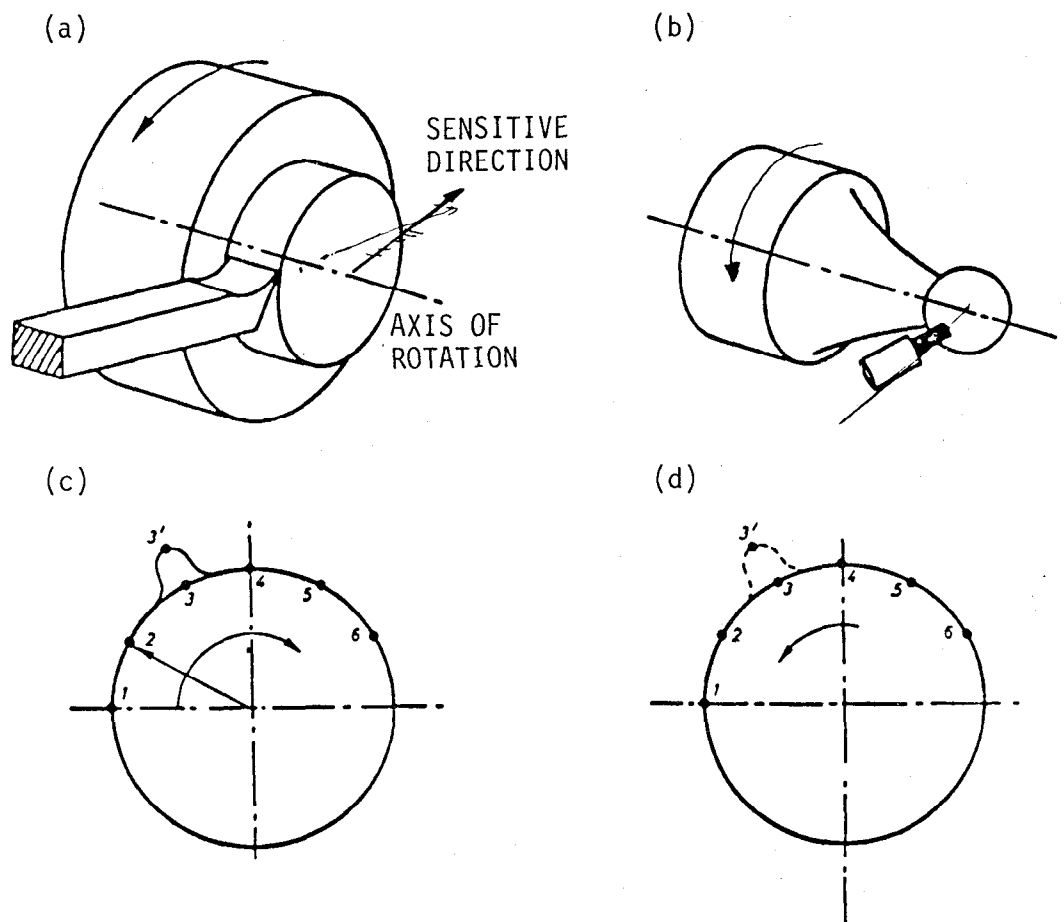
Radial plunge turning: (a) plunging operation; (b) measuring set-up; (c) figure on the screen; (d) section of the workpiece.
